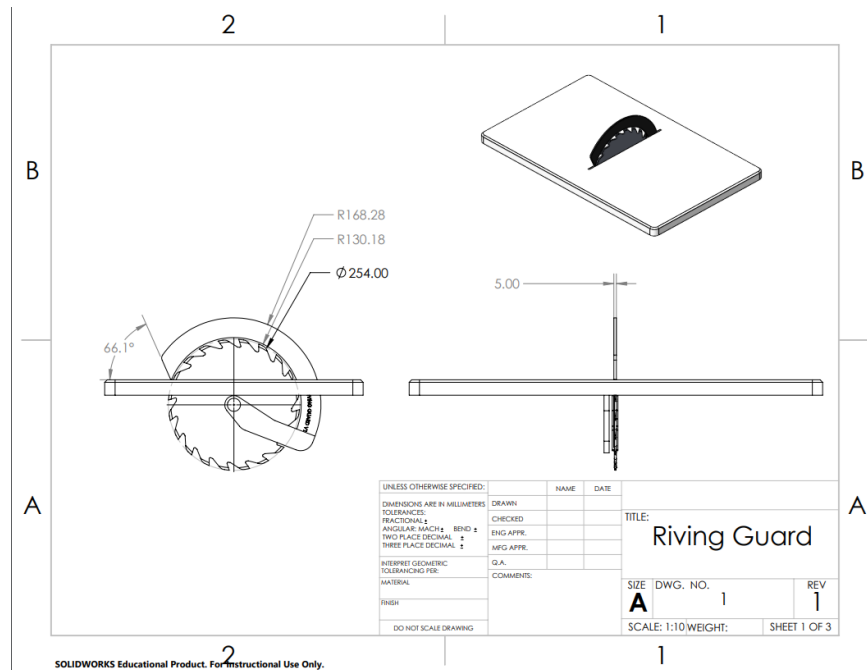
Technical drawing of the original drive shaft-mounted riving guard, showing measurements.
